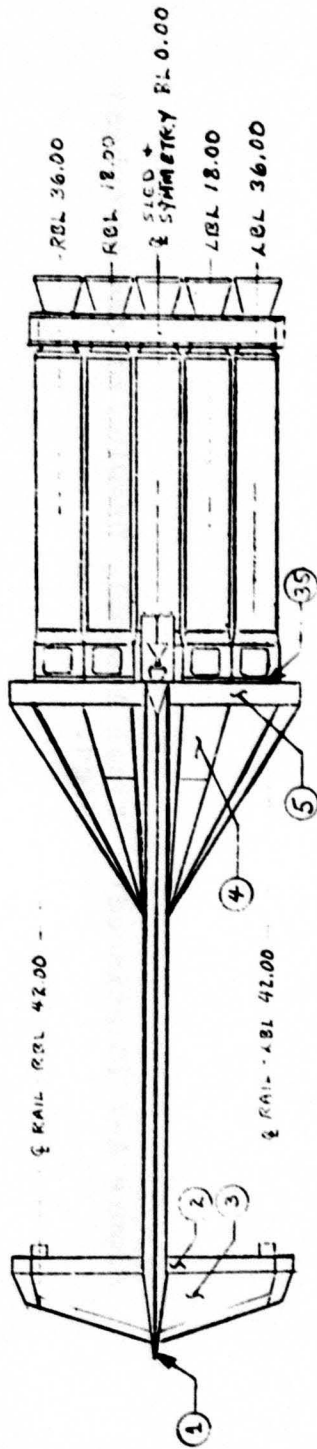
(Continued). Final Assembly Drawing of the Arrowhead Sled.
